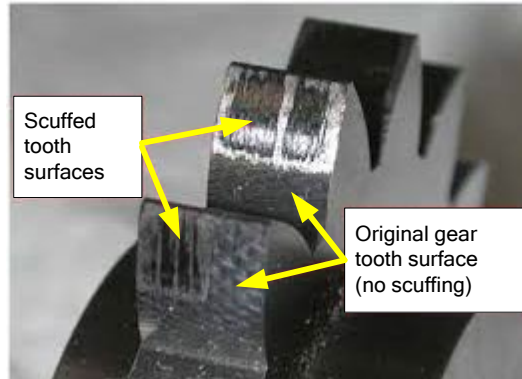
An example of tooth surface severe scoring defect [24].
